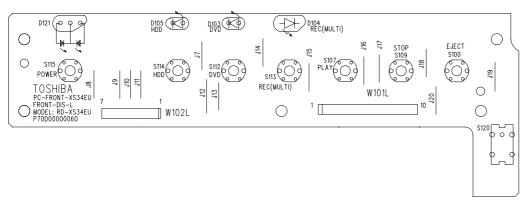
EU03B Front (L) PC Broad (Top side)
